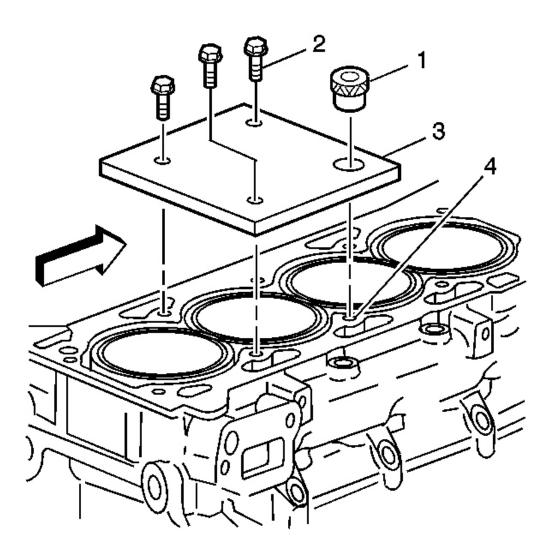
View Of Bushing, Fixture Plate, Bolts & Bolt Hole Courtesy of GENERAL MOTORS CORP.
